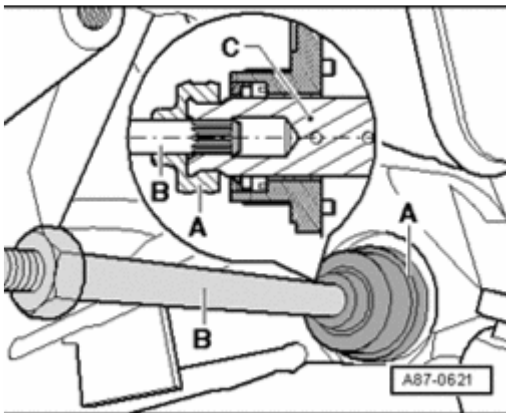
Removing/Installing Boot & Pulling Drive Shaft Out/In Of Splines Of Drive Pinion
